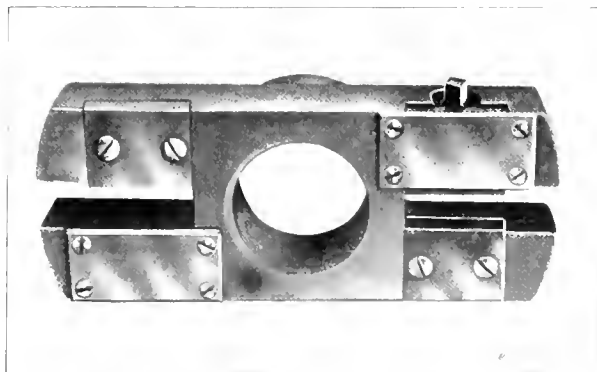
Improved Form of Driving Plate for the Milling Machine
